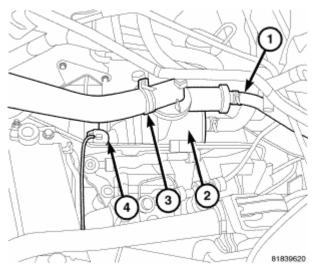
SECONDARY THERMOSTAT Courtesy of CHRYSLER LLC
